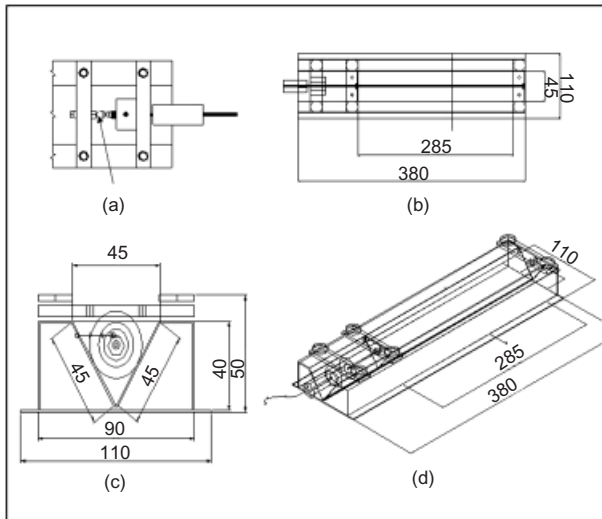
Dimensions and view of the linear test mould: (a) contact of LVDT and steel insert; (b) plan; (c) elevation; (d) isometric view. All dimensions in mm
